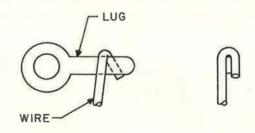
Wrap for Wire Size No. 26 or Larger on a Lug with No Hole
